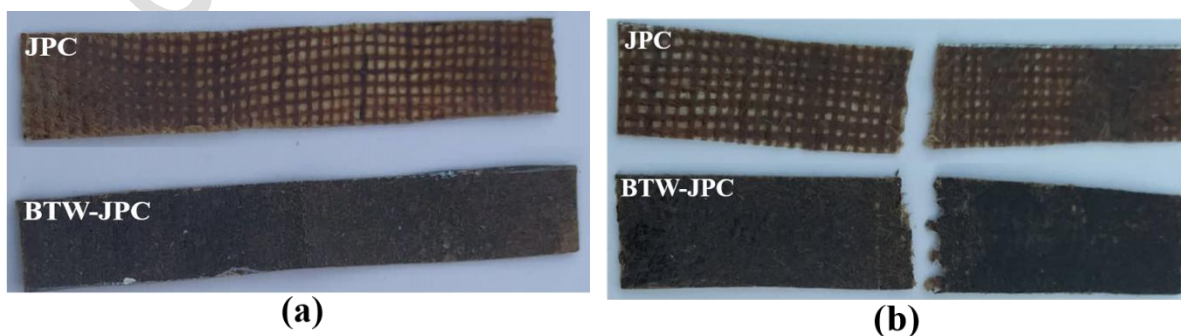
Tensile test specimen (a) before fracture (b) after fracture.
